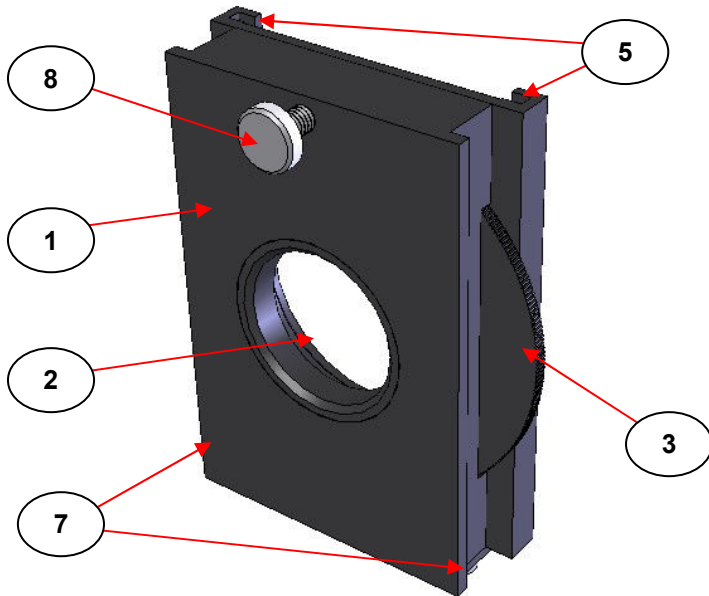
Rear Side View of Rotator 3" x 2" Slide Mount P/N GS12500
